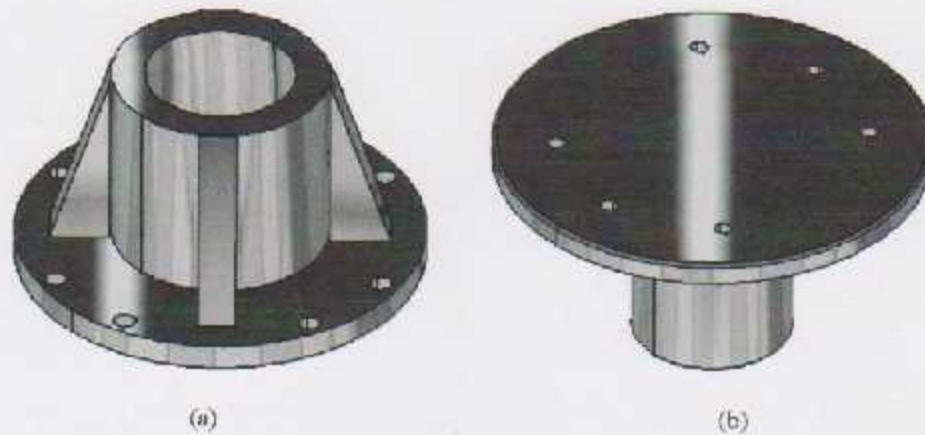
Revolute joint: (a) lower flange, (b) upper flange
